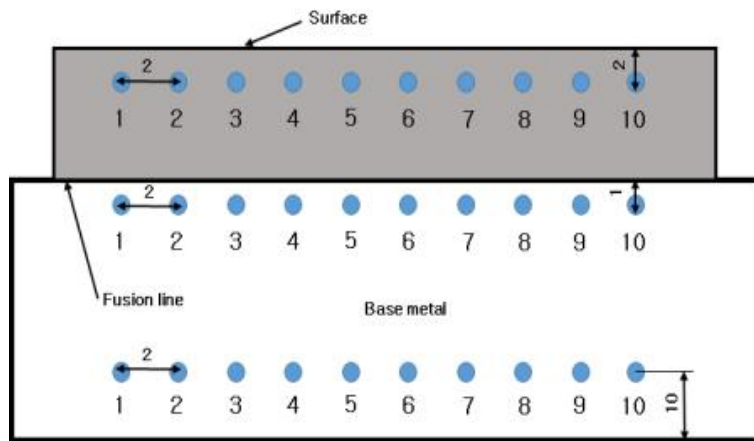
Overlay welding specimen hardness test locations.
